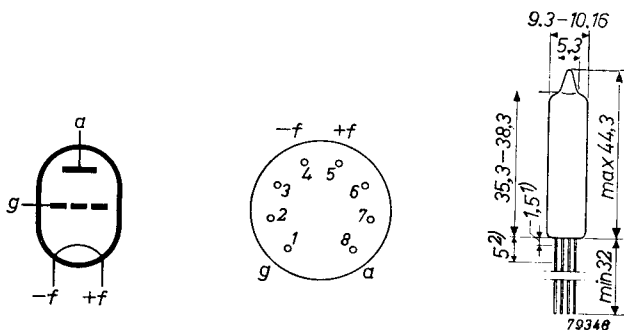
Electrode arrangement, electrode connections and maximum dimensions in mm.
